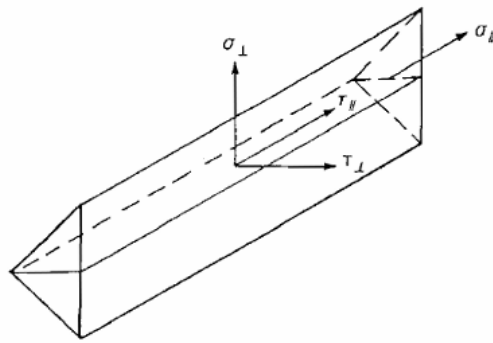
Stresses that are located on the throat section of fillet welds. [14, Sec. 4.5.3.2]
